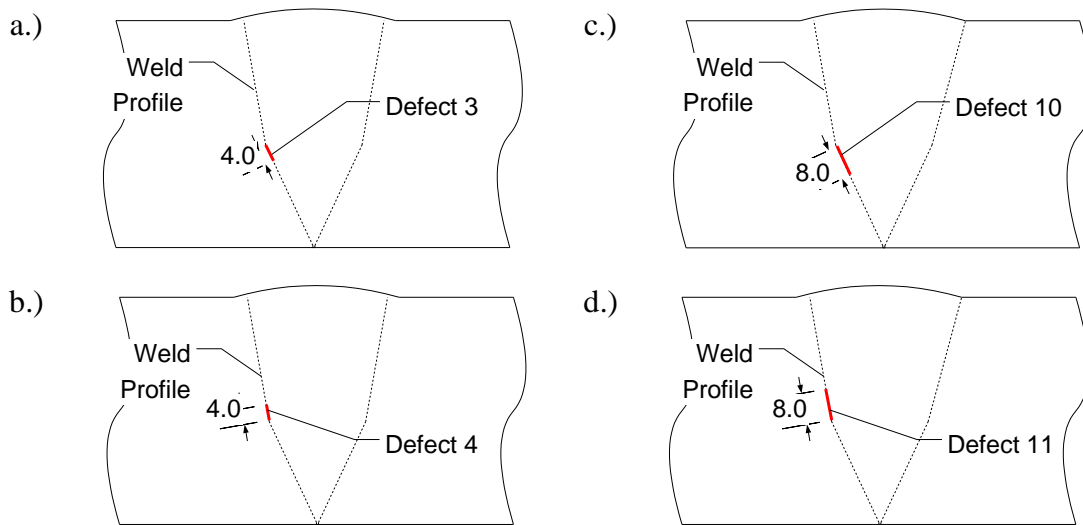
Schematic diagram of defects contained in the conformable phased array welded evaluation block 2, a.) defect 3, b.) defect 4, c.) defect 10, d.) defect 11.
